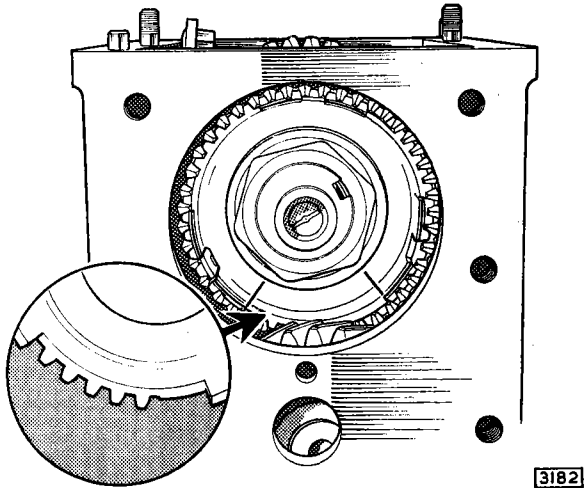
Rotate the mainshaft until one of the cut-away portions of the 3rd/top synchro hub is in line with the counter shaft.
